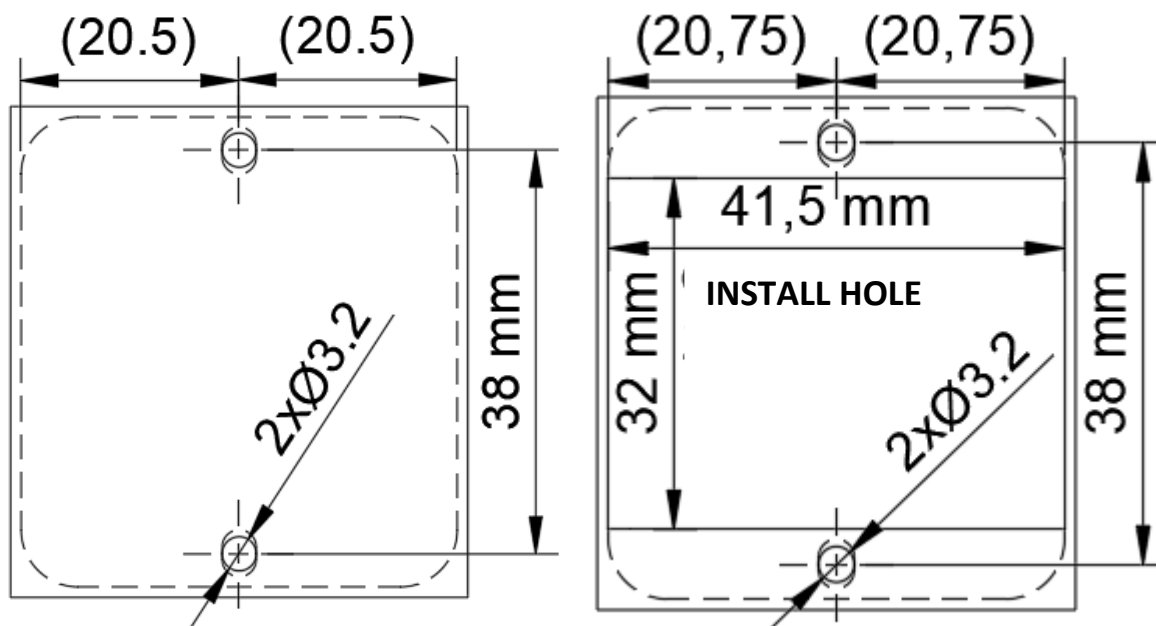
Installation holes a) on the surface b) recessed into the hole
